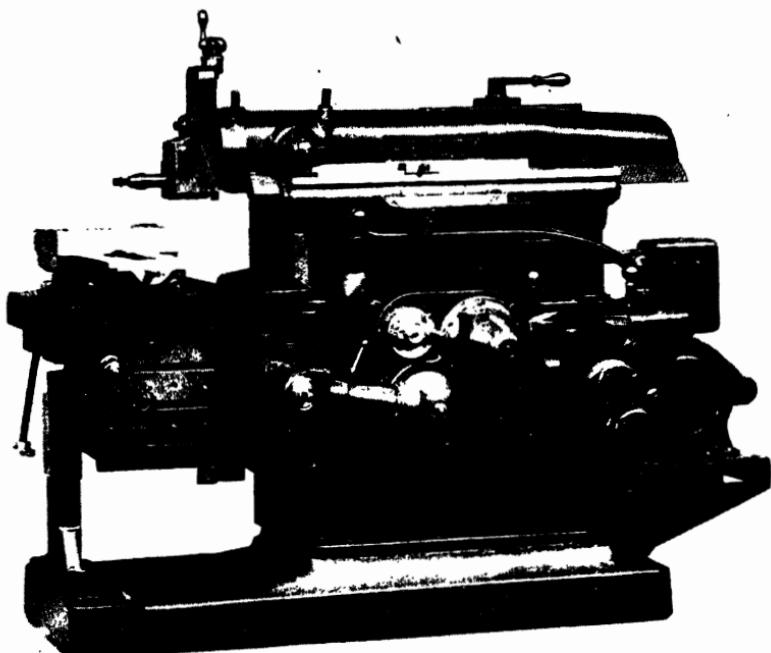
Individually driven metal shaper. (*Courtesy, Hendey Machine Co.*)
